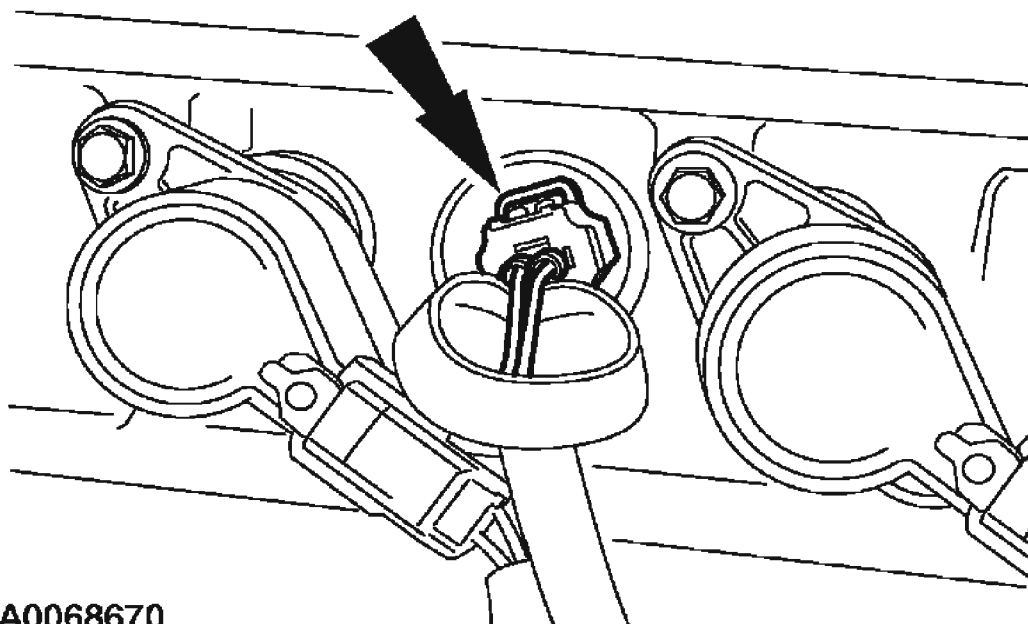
Connecting CHT Sensor Electrical Connector And Installing Connector Boot
